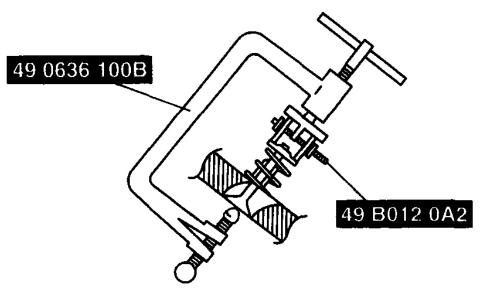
Exploded View Of Cylinder Head (II) Disassembly Courtesy of MAZDA MOTORS CORP.
